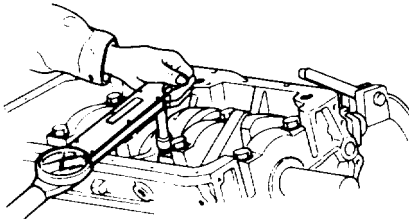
Tightening Connecting Rod Bearing Caps .
